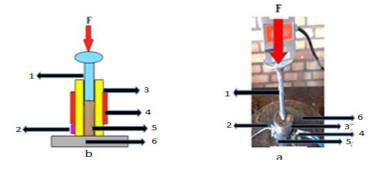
Mold: the a) real idea of the mold diameter, b) schematic and. 1) piston, 2) thermocouple, 3) compression mold wall, 4) thermal belt, 5) material bulk location, 6) mold bottom blocker
